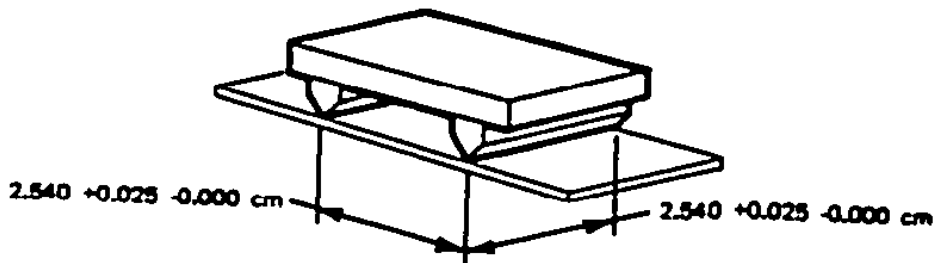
Alternate aspect of insulator plate-electrode assembly.
